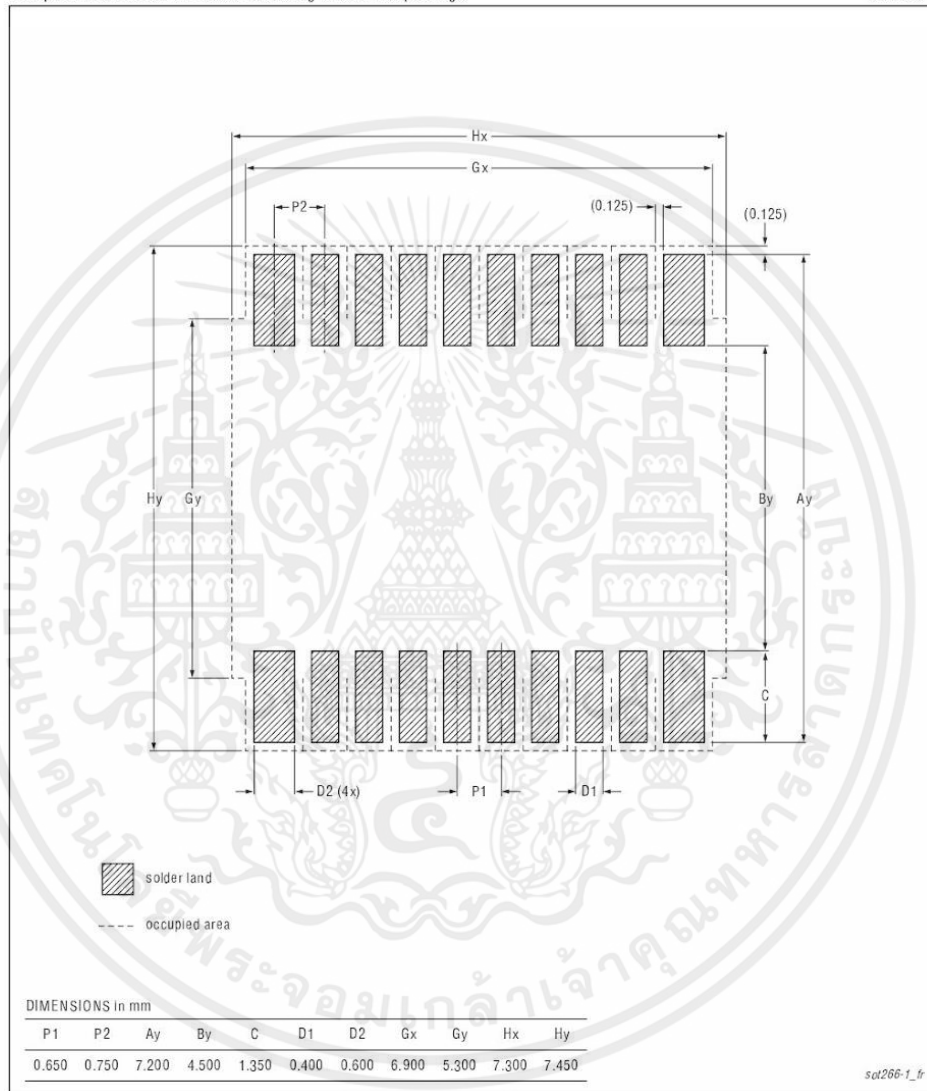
PCB footprint for SOT266-1 (SSOP20); reflow soldering
